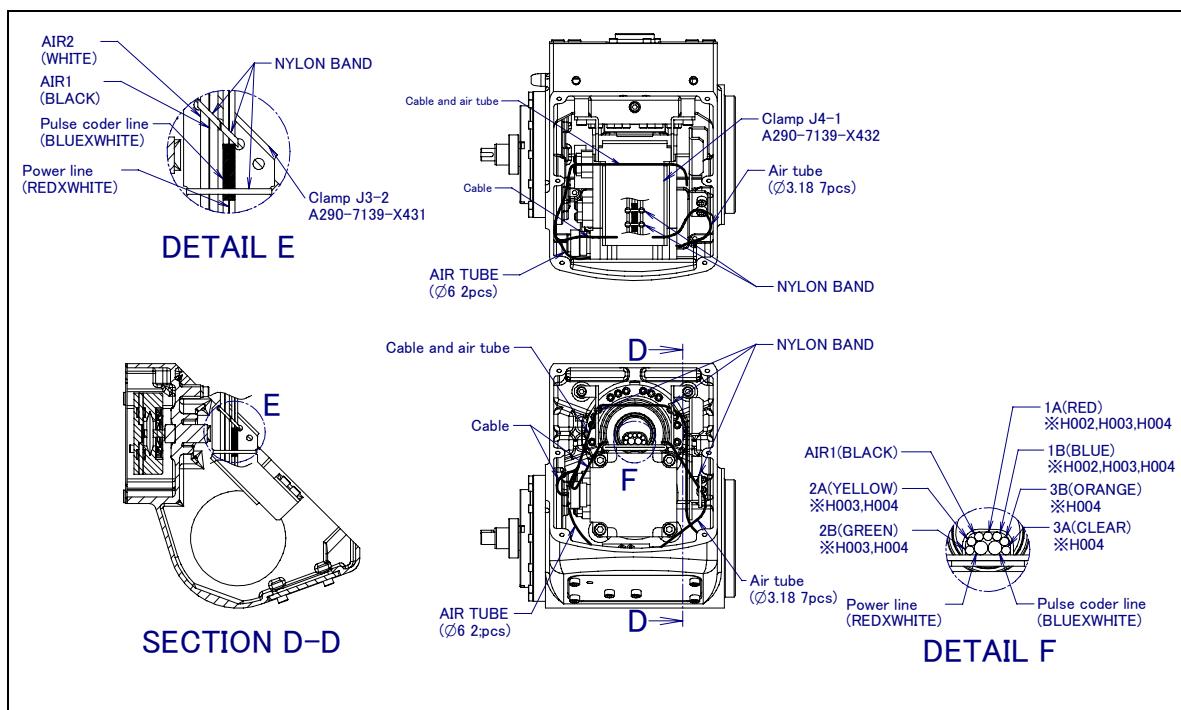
(d) Cable clamp in parts of J3 casing
